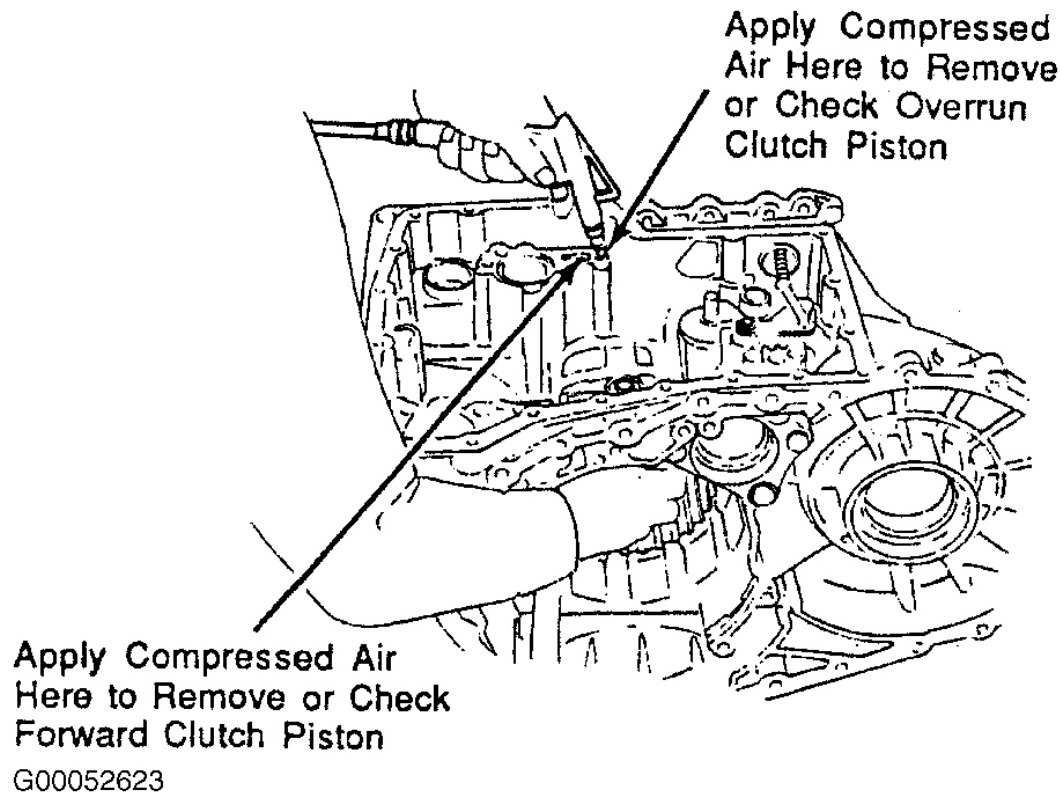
Removing & Checking Forward Clutch & Overrun Clutch Pistons
